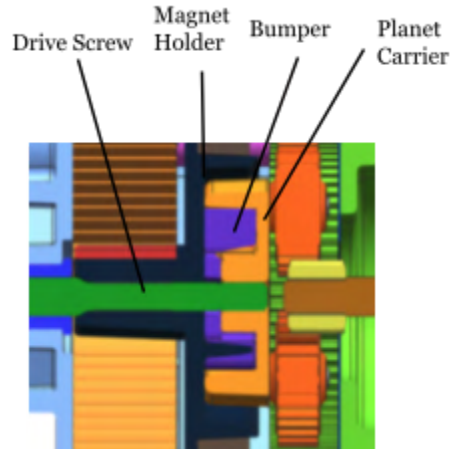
A cross-sectional view drive screw, magnet holder, bumper, and planet carrier is depicted. The drive screw is rigidly connected to the magnet holder and is slip fit to the planet carrier center.
